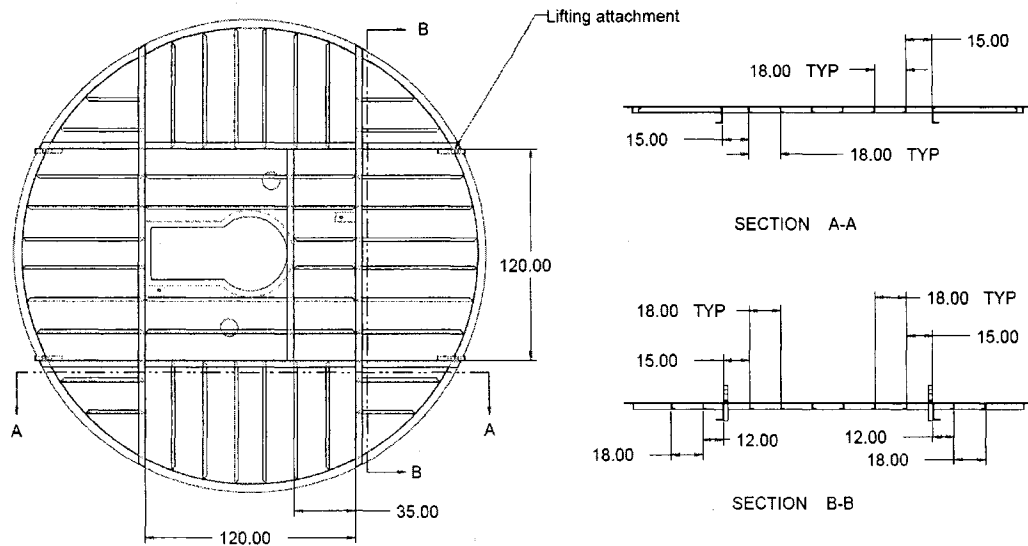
Bottom view of Main Deck with scantling spacing detail.
